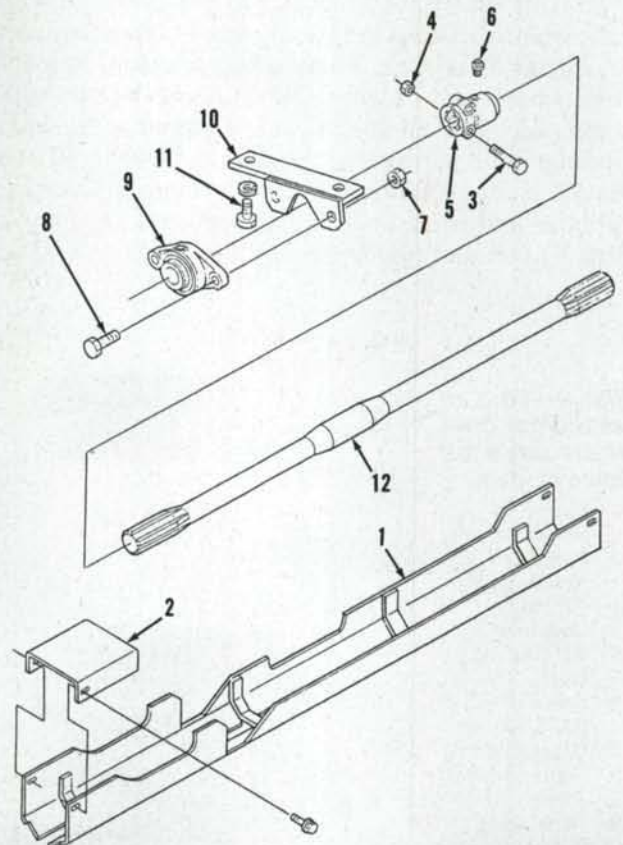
View of drive shaft and shield used on most four-wheel-drive models. Waterproof drive shaft is shown in Fig. 8.
